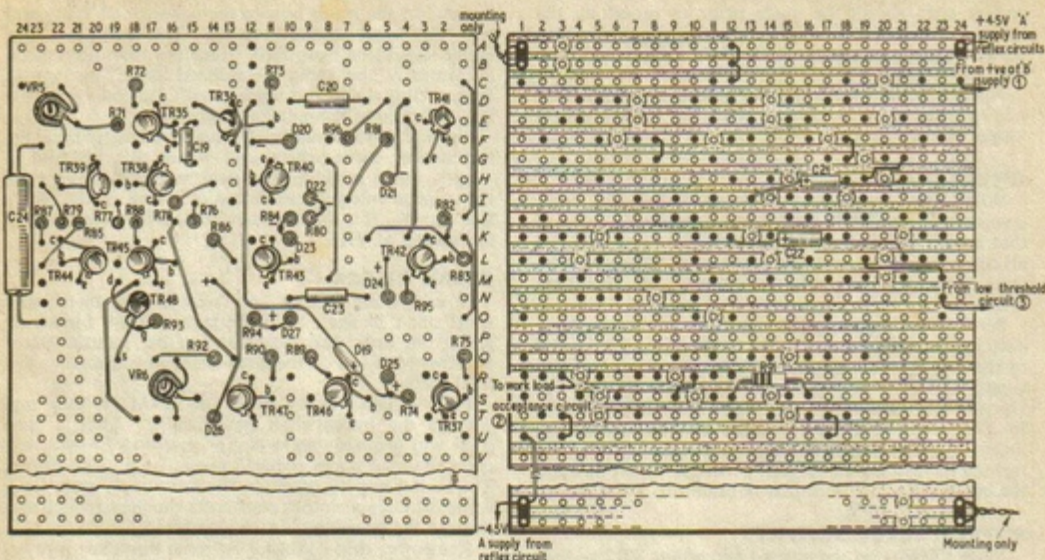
Component layout and wiring for the new board: (a) component side, (b) copper side showing breaks in the copper strips
